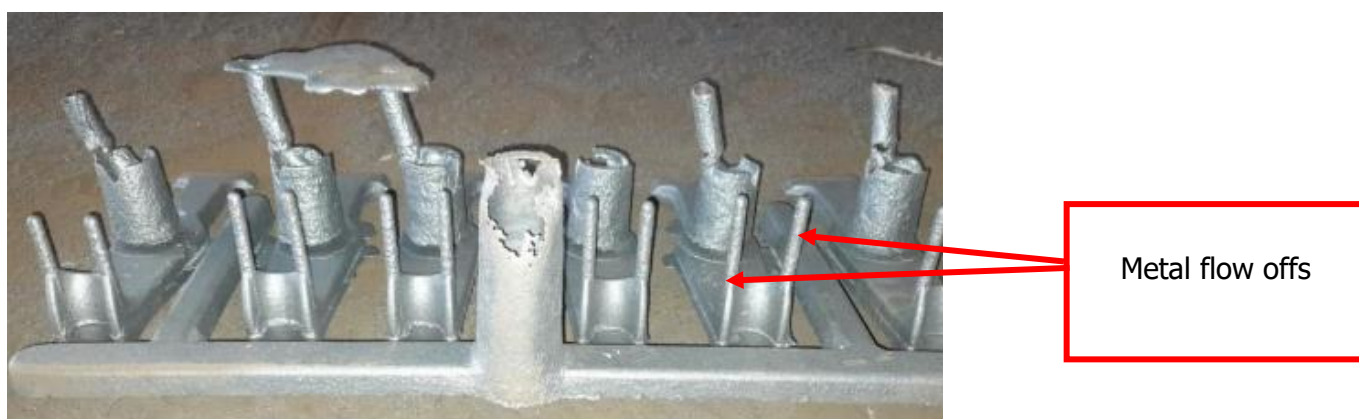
Illustrates sections to be cut off by supplier from Centre piece castings.
